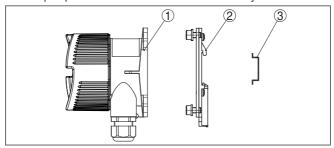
RD150 with aluminium and stainless steel housing for carrier rail mounting
